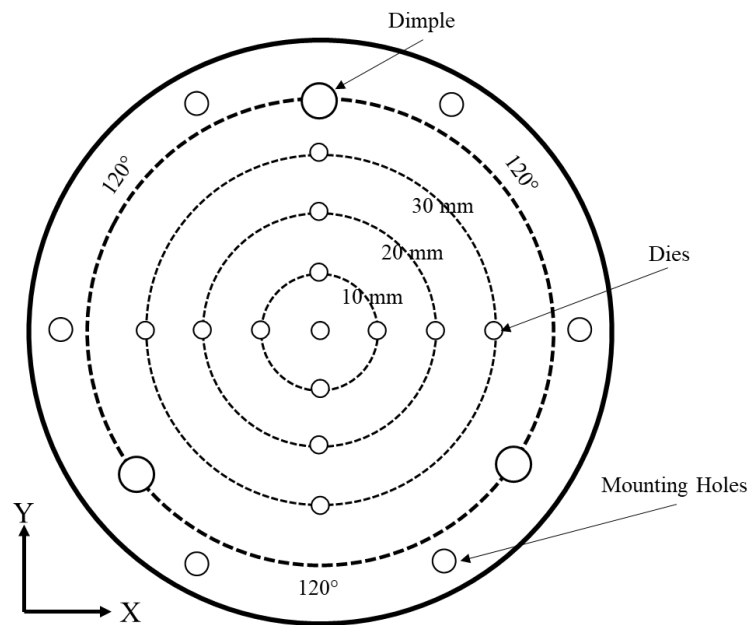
Layout of complementary mold inserts, showing locations of through-holes and dimples.
